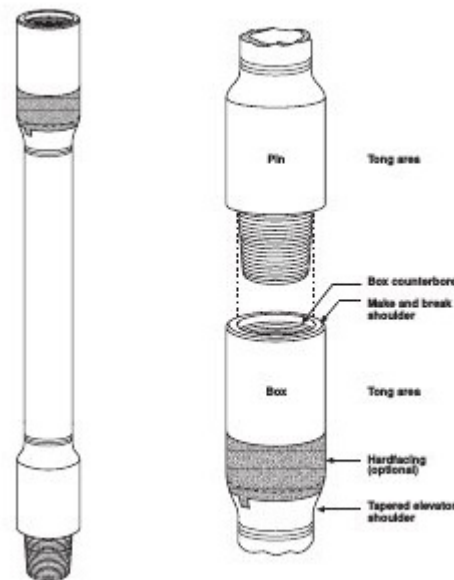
Tool Joints. Reprinted from *Oil & Gas Drilling Engineering*. Retrieved January 16, 2015, from <http://www.oilngasdrilling.com/tag/tool-joint>
